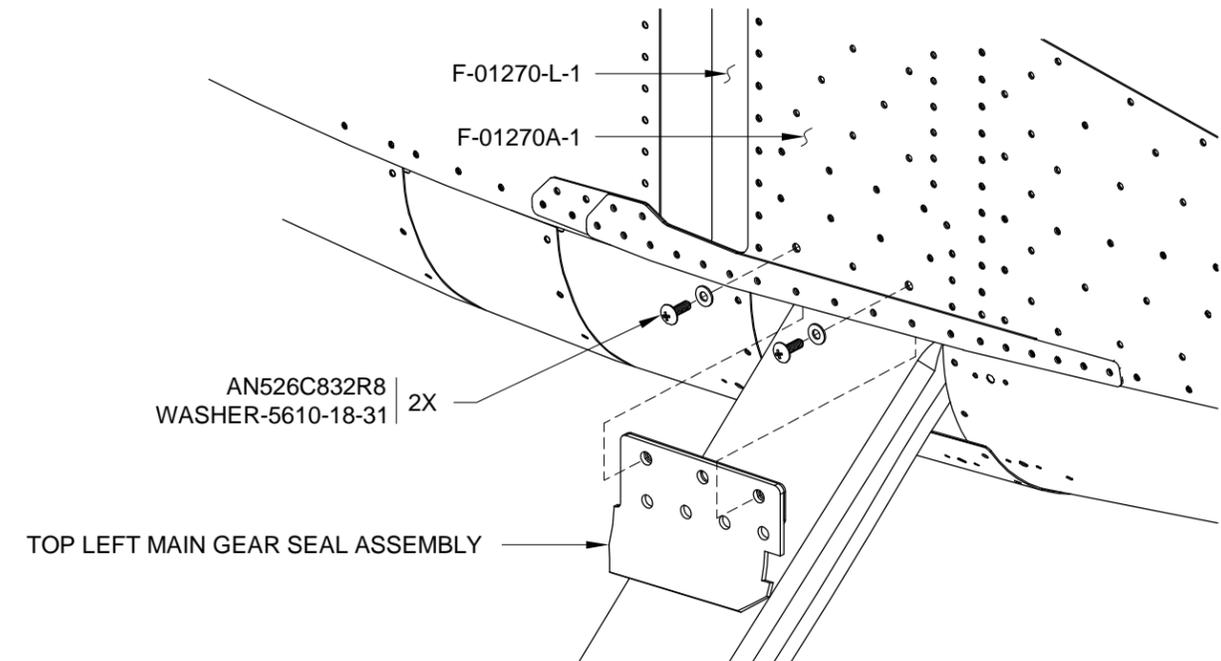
ATTACHING THE TOP MAIN GEAR SEAL ASSEMBLIES
